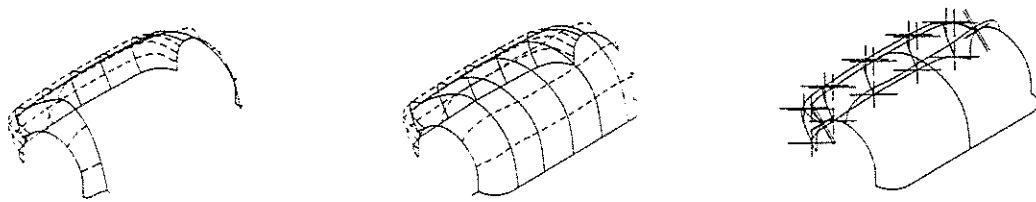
Trimmed surfaces, base surfaces, and wires for the rear surfaces
